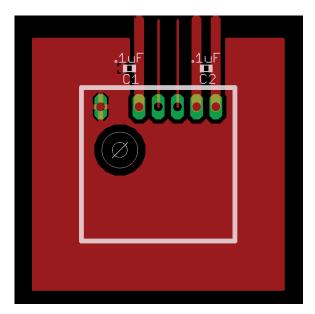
Example PCB layout with ground plane construction and decoupling capacitors (TOP view)
